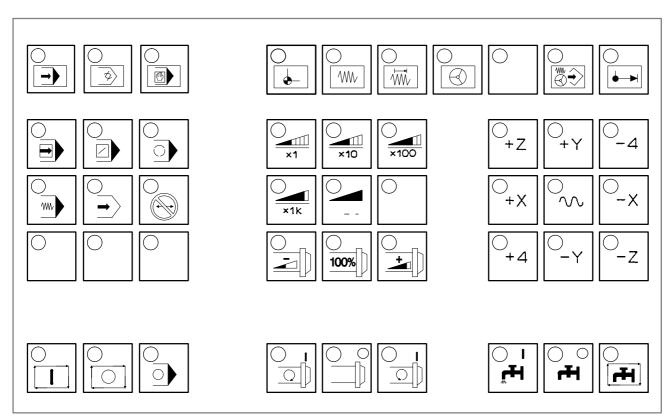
(d) Front view of machine operator's panel for standard unit (M series)
